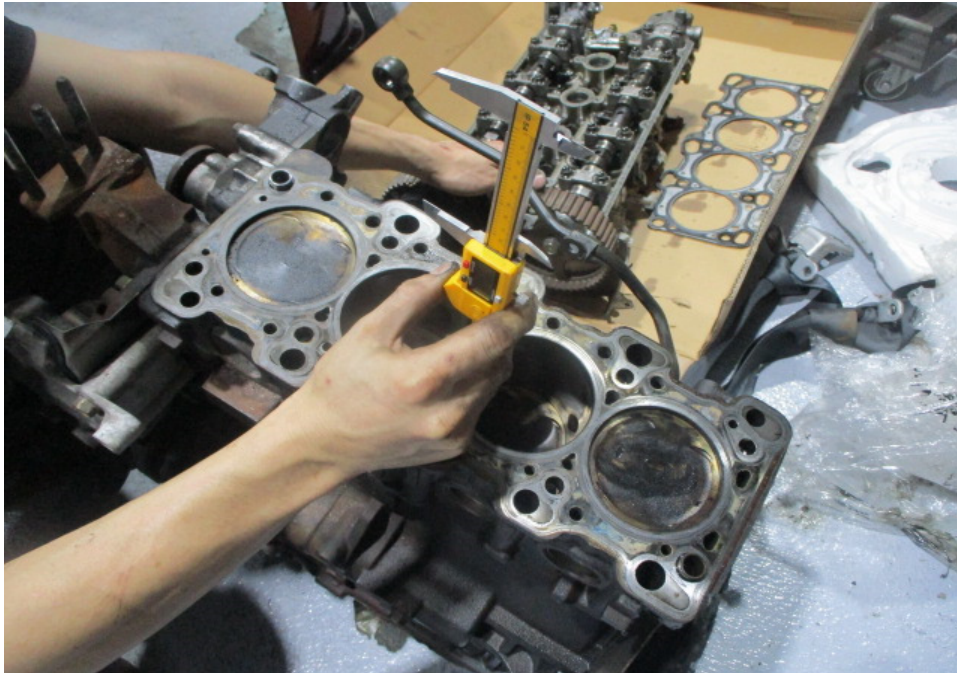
shows measurement of the stroke of cylinder 3 of the Mitsubishi engine that I had inspected. The bore and stroke measurements of the Mitsubishi engine were carried out using a digital Vernier Caliper that was calibrated before the start of measurements.
